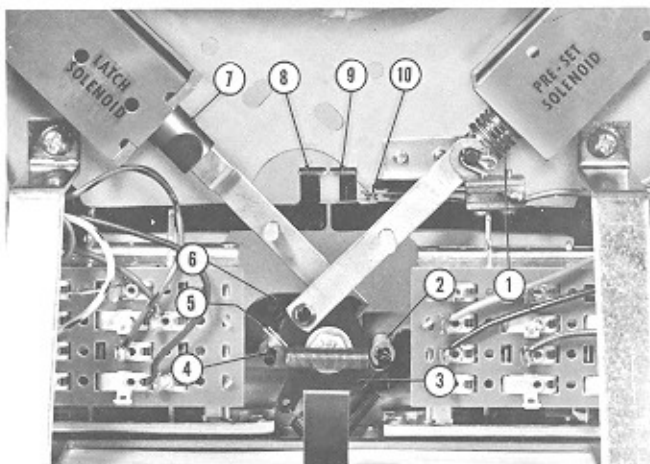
SELECTOR SWITCH ADJUSTMENT
